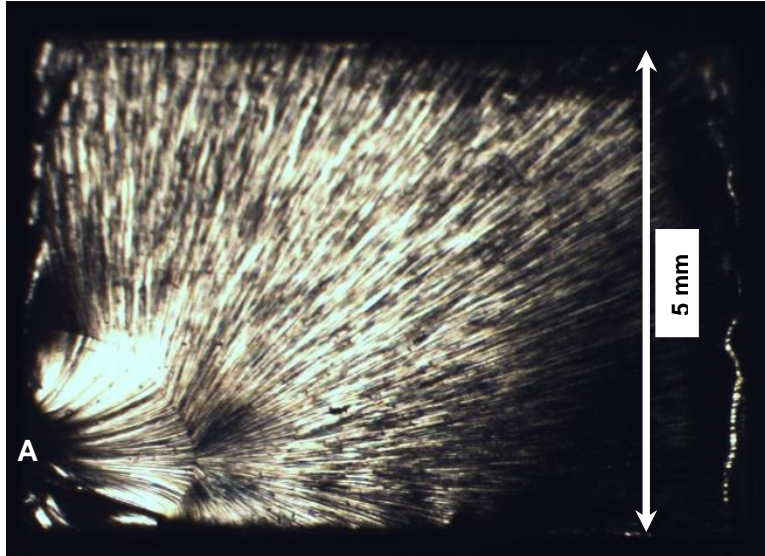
Tensile fracture surface for neat MACOPS
